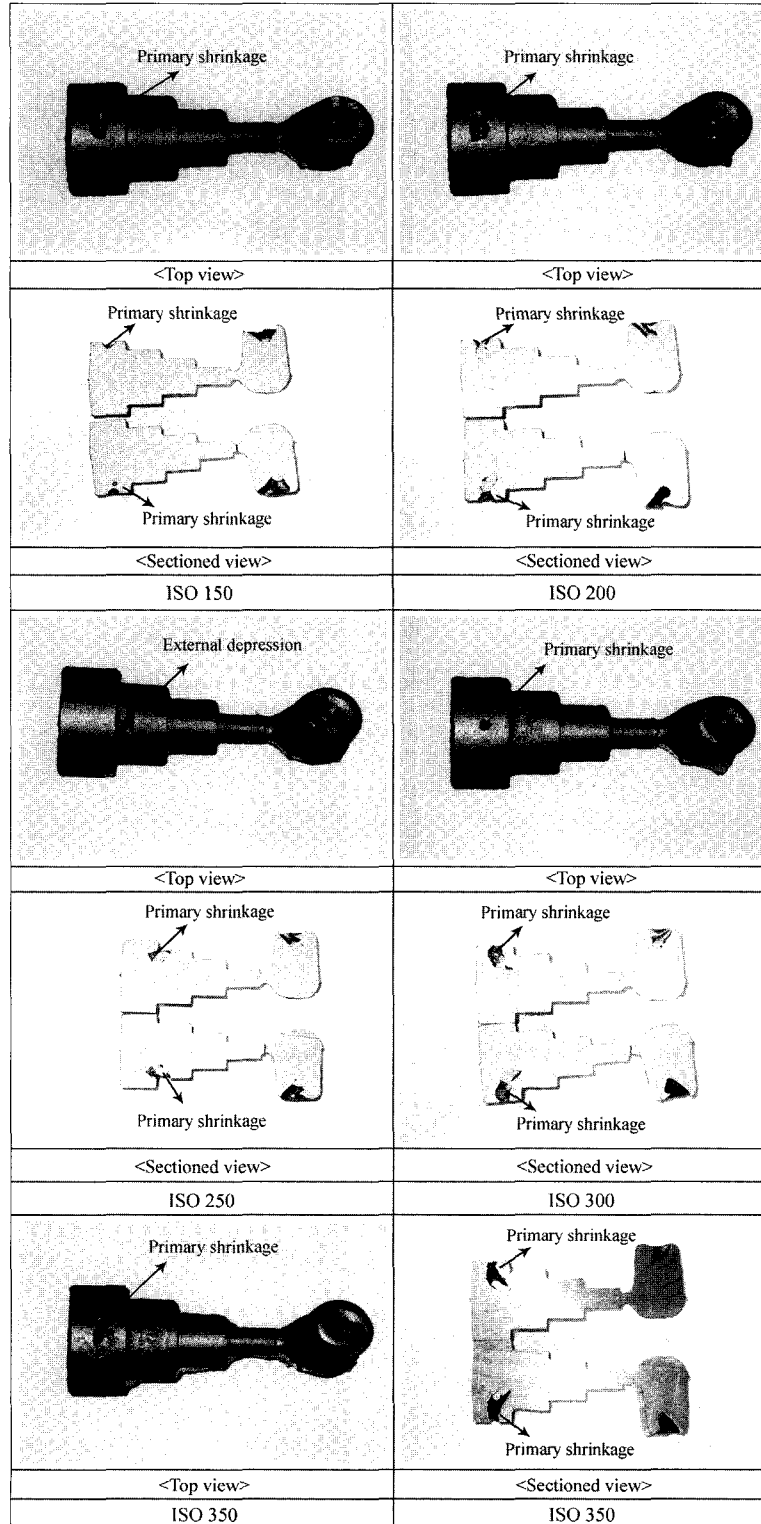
Top and sectioned views of the five specimens in the No. 1 risering design.
